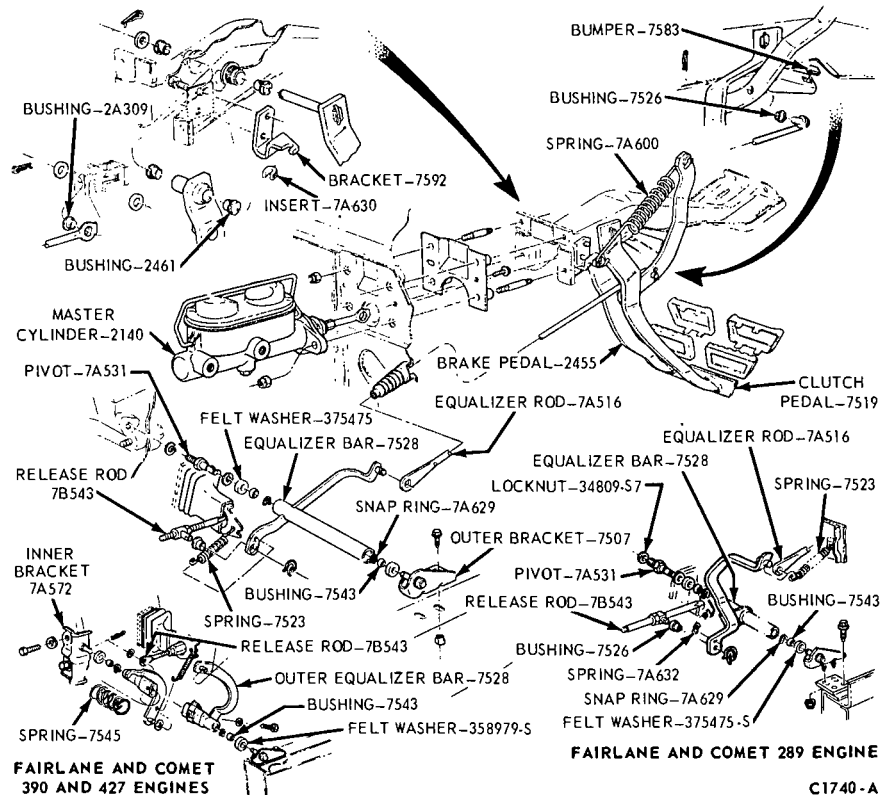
Fairlane and Comet Clutch Linkage Disassembled
